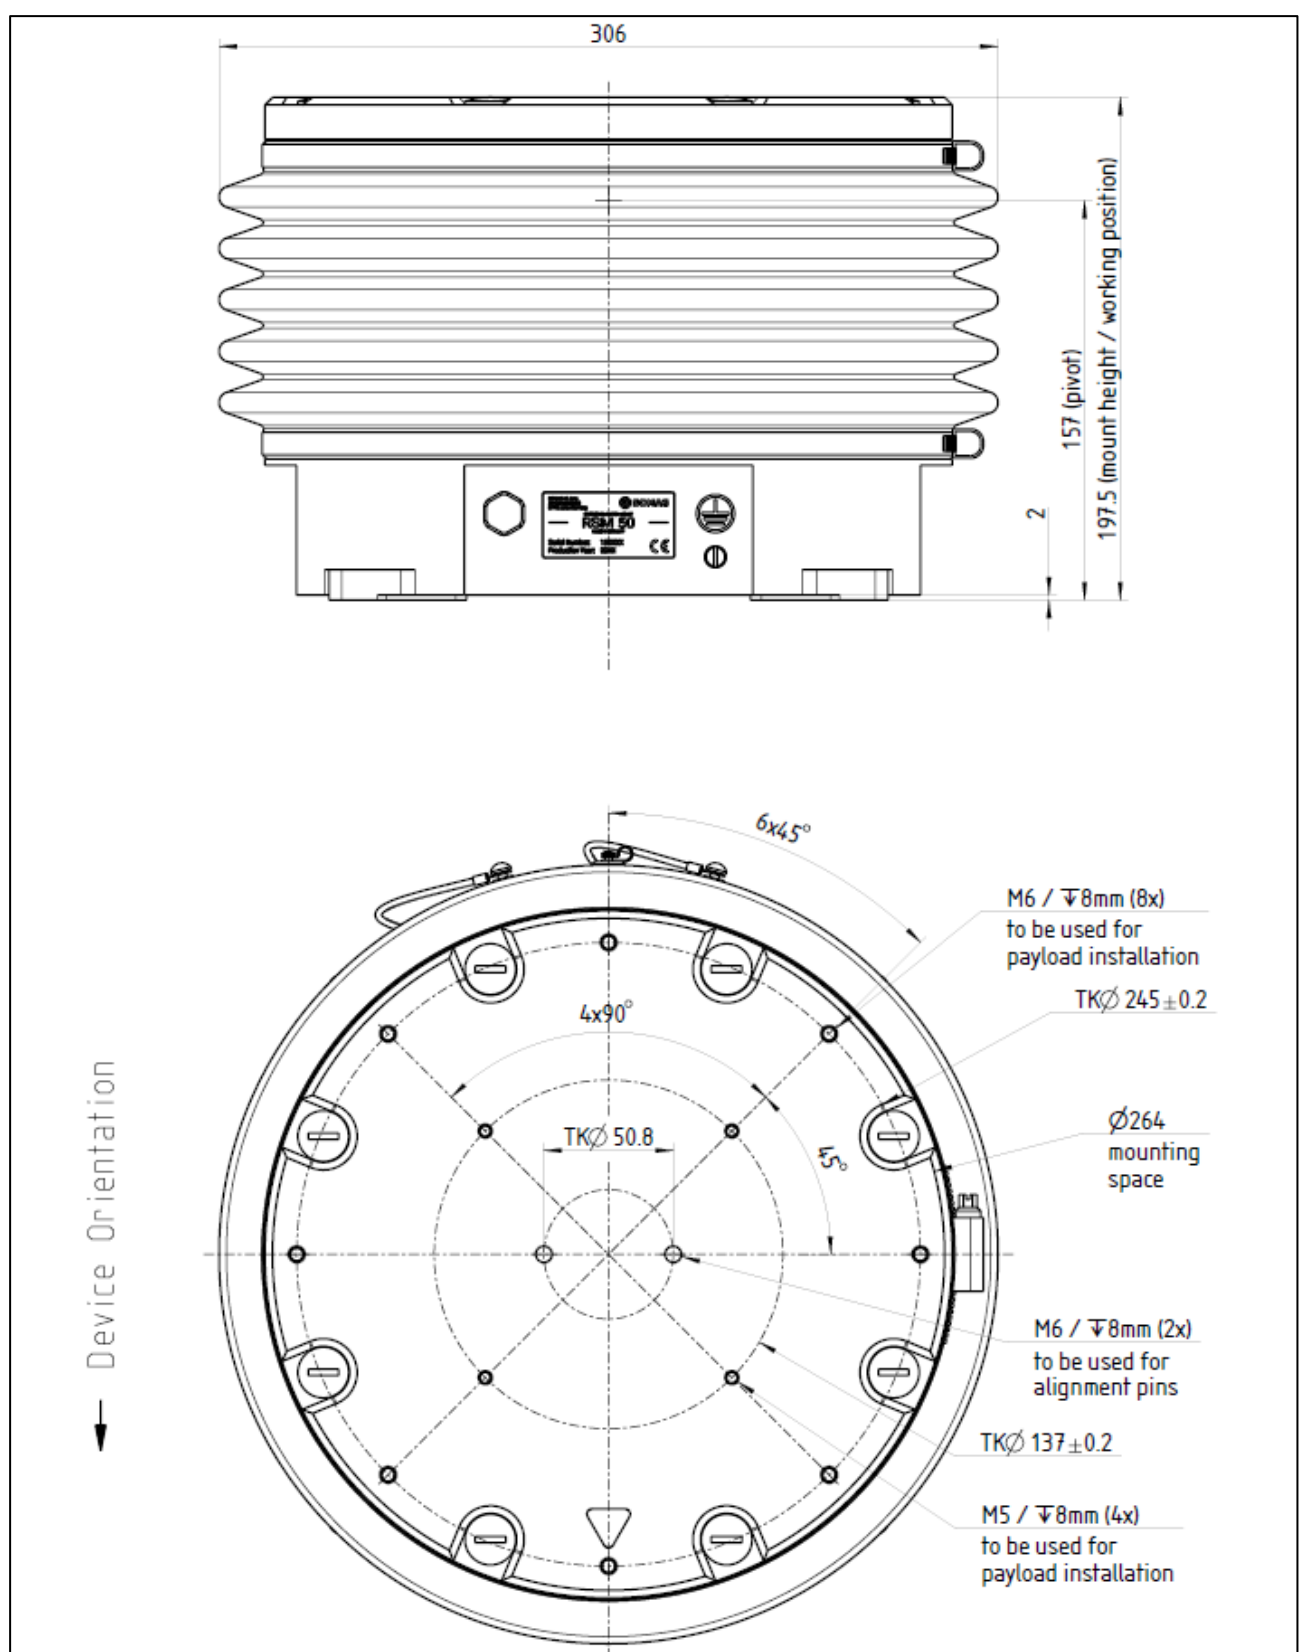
RSM 50 payload mounting holes, main dimensions and pivot
